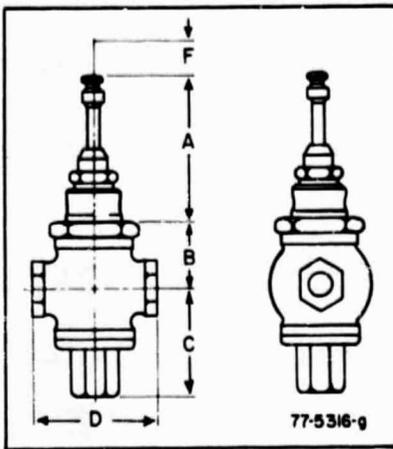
V5013A SCREWED BODY DIMENSIONS (REFER TO TABLE 2 & 3)
